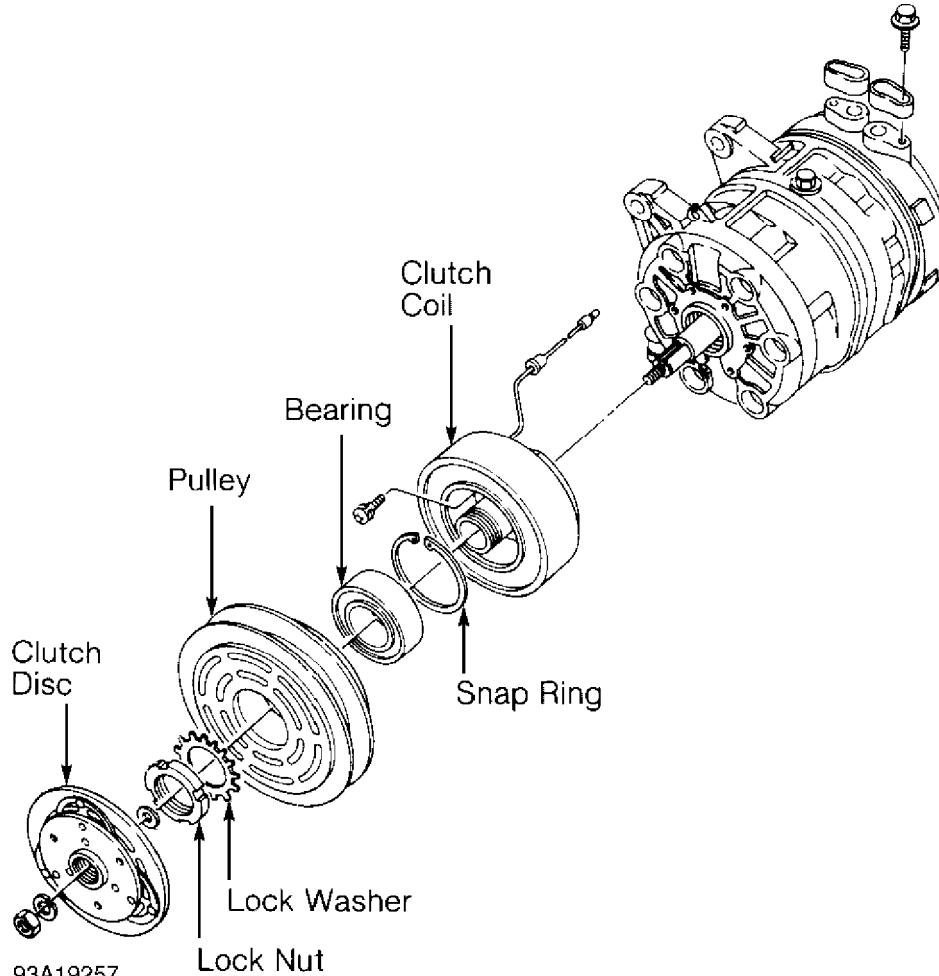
Exploded View Of Compressor (Zexel DKS-16H 6-Cylinder)
